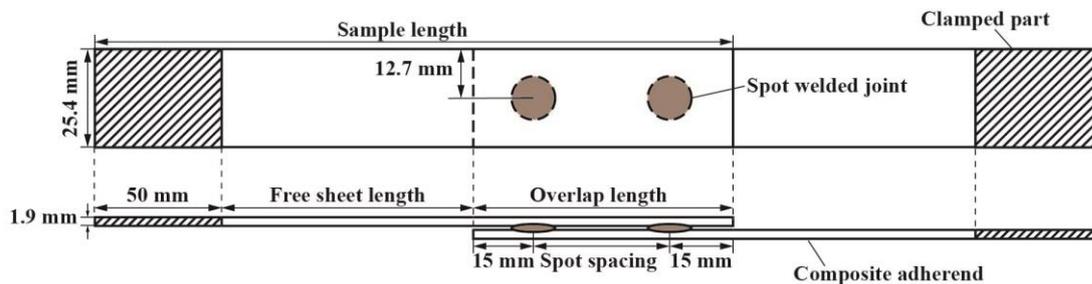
Schematic of the generic configuration of multi-spot welded single-lap shear joint specimen in this study.
